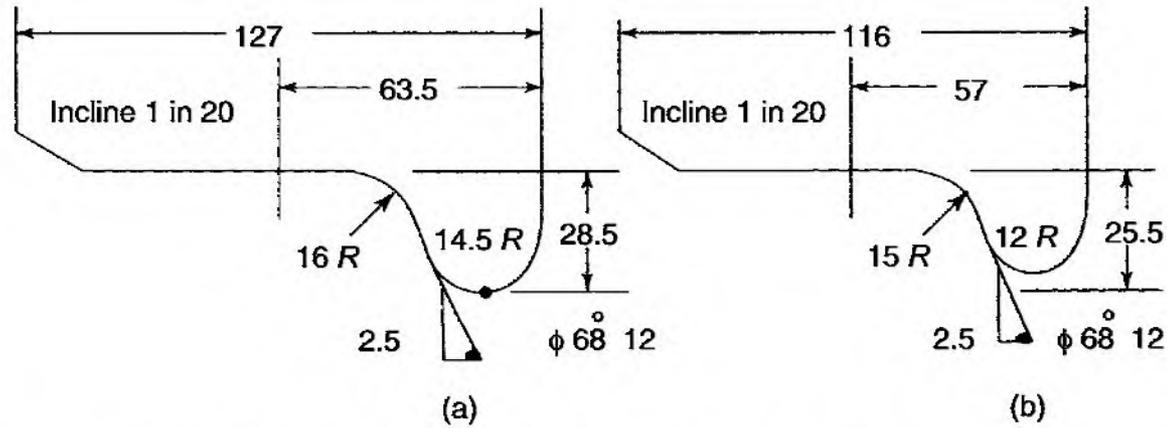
Profile of a new wheel with standard flange (a) BG wheel (b) MG wheel, (all dimensions in mm)
